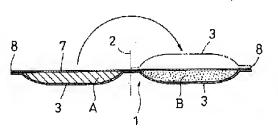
It is an explanatory view showing the manufacture process of the container shown in drawing 5.
